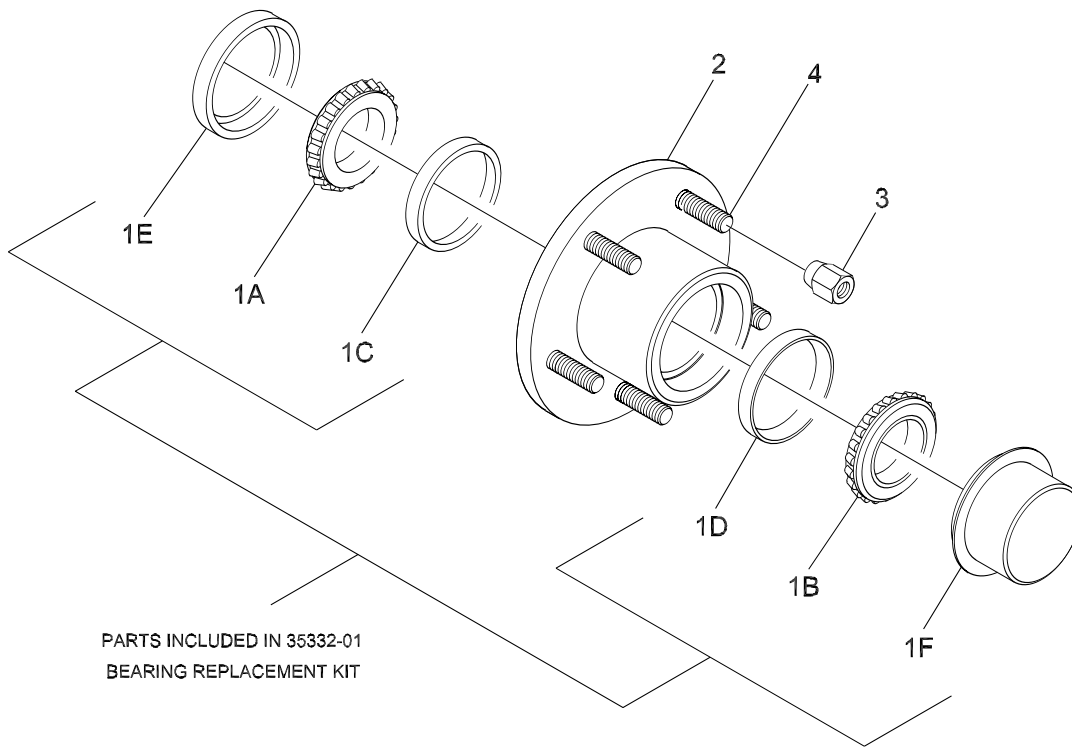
HUB ASSEMBLY, 5 BOLT
